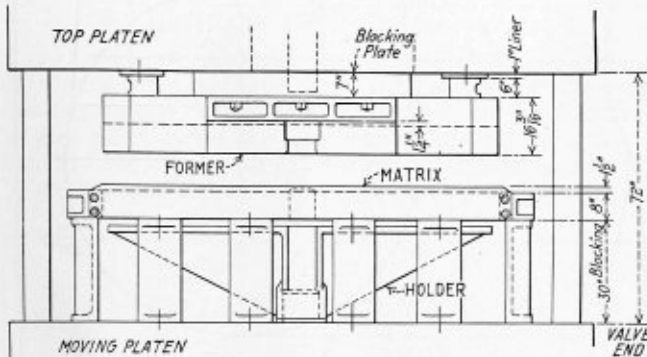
Arrangement of Forming Dies in 500-Ton Hydraulic Press
